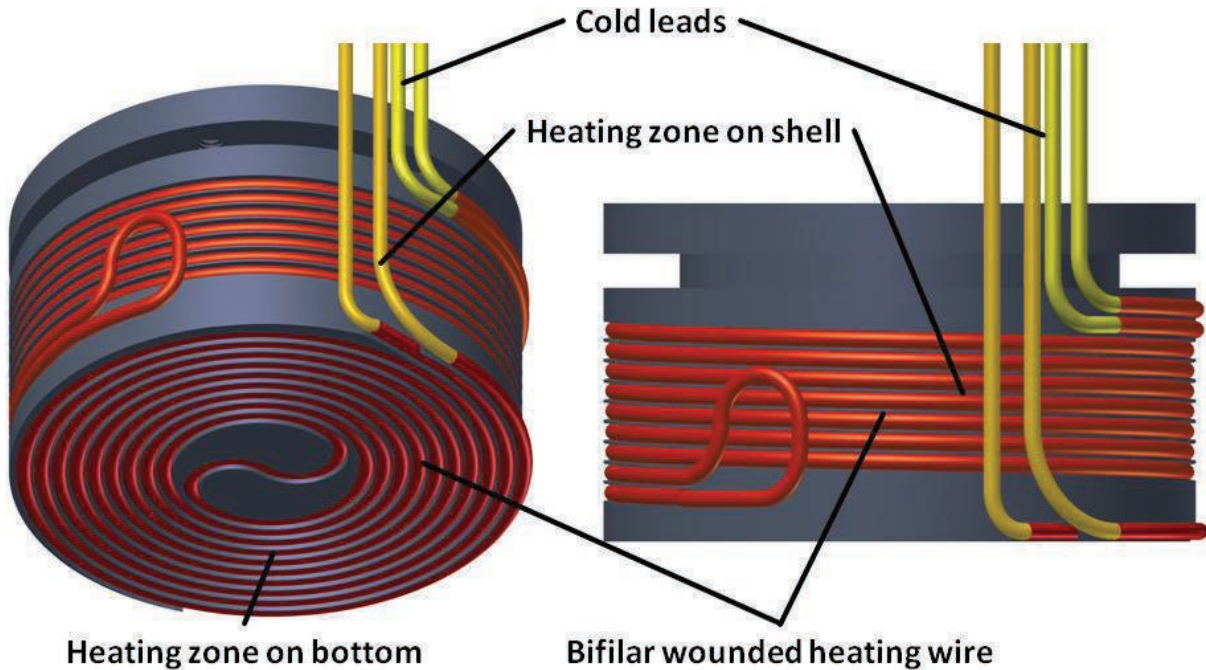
Sketch of the sample holder with heating wires. The new sample holder features milled grooves for two bifilar coiled (for reduction of the produced electromagnetic field) heating wires. The heating wires are soldered into the milled grooves for a better thermal conduction.
